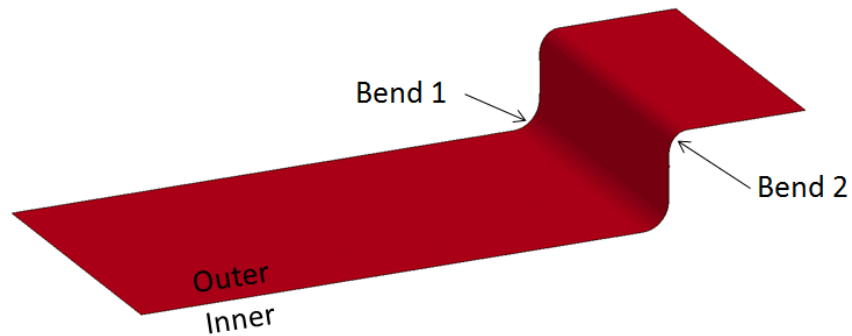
Orientation of outer and inner shell surfaces of the blank indicating position of surface integration points.
